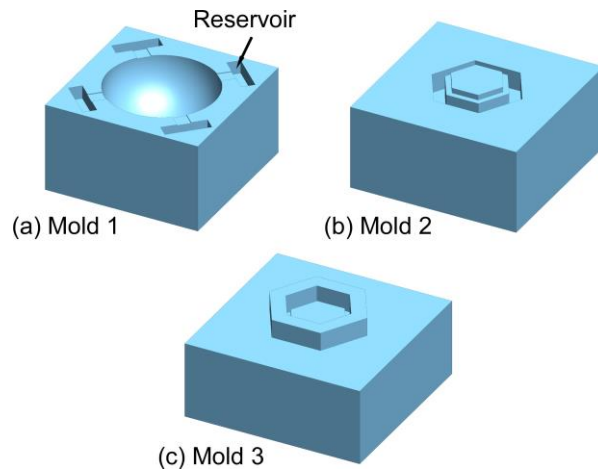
(a) Mold 1 has a hemispherical cavity which is used to mold the backside features of Shell 1 and Shell 2. The reservoirs are used to displace excess LCP materials to form flash. (b) Features of Mold 2 are the counterparts of that in Shell 1. Mold 2 is used along with Mold 1 to form Shell 1. (c) Features of Mold 3 are the counterparts of that in Shell 2. Mold 3 is used along with Mold 1 to form Shell 2.
